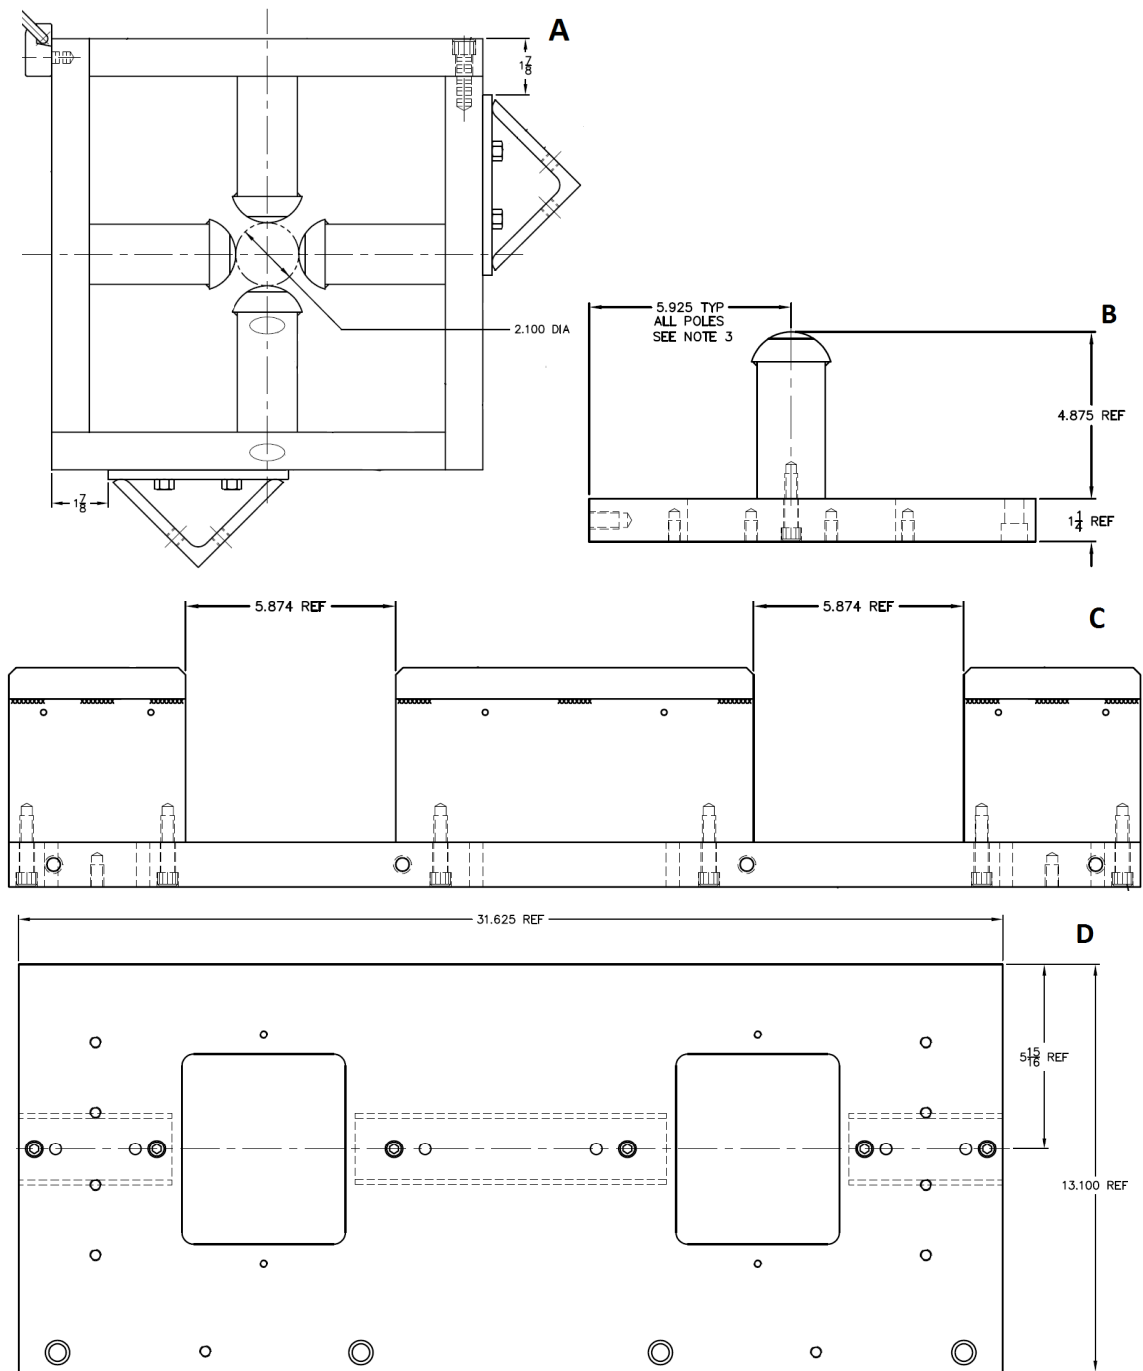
Schematic view of the magnetic quadrupole triplet lens (QP). Different views are displayed as follows: front view (A), a single pole detail (B), longitudinal section (C), side view (D). Dimension are inches (from the manufacturer's documentation).
